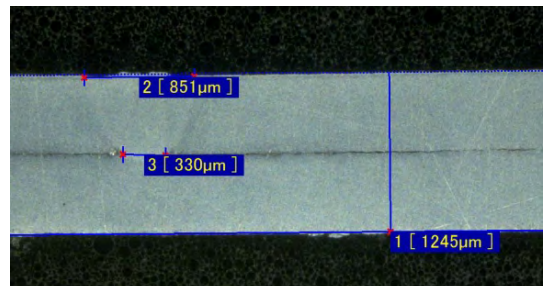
Picture of weld without gap, with 1 mm defocus
